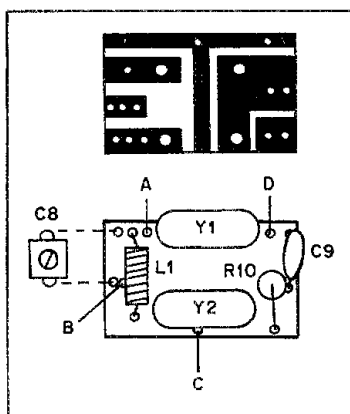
Tail-end filter circuit-board etching pattern and parts-placement diagram. The etching pattern is shown full size with black areas representing copper.
